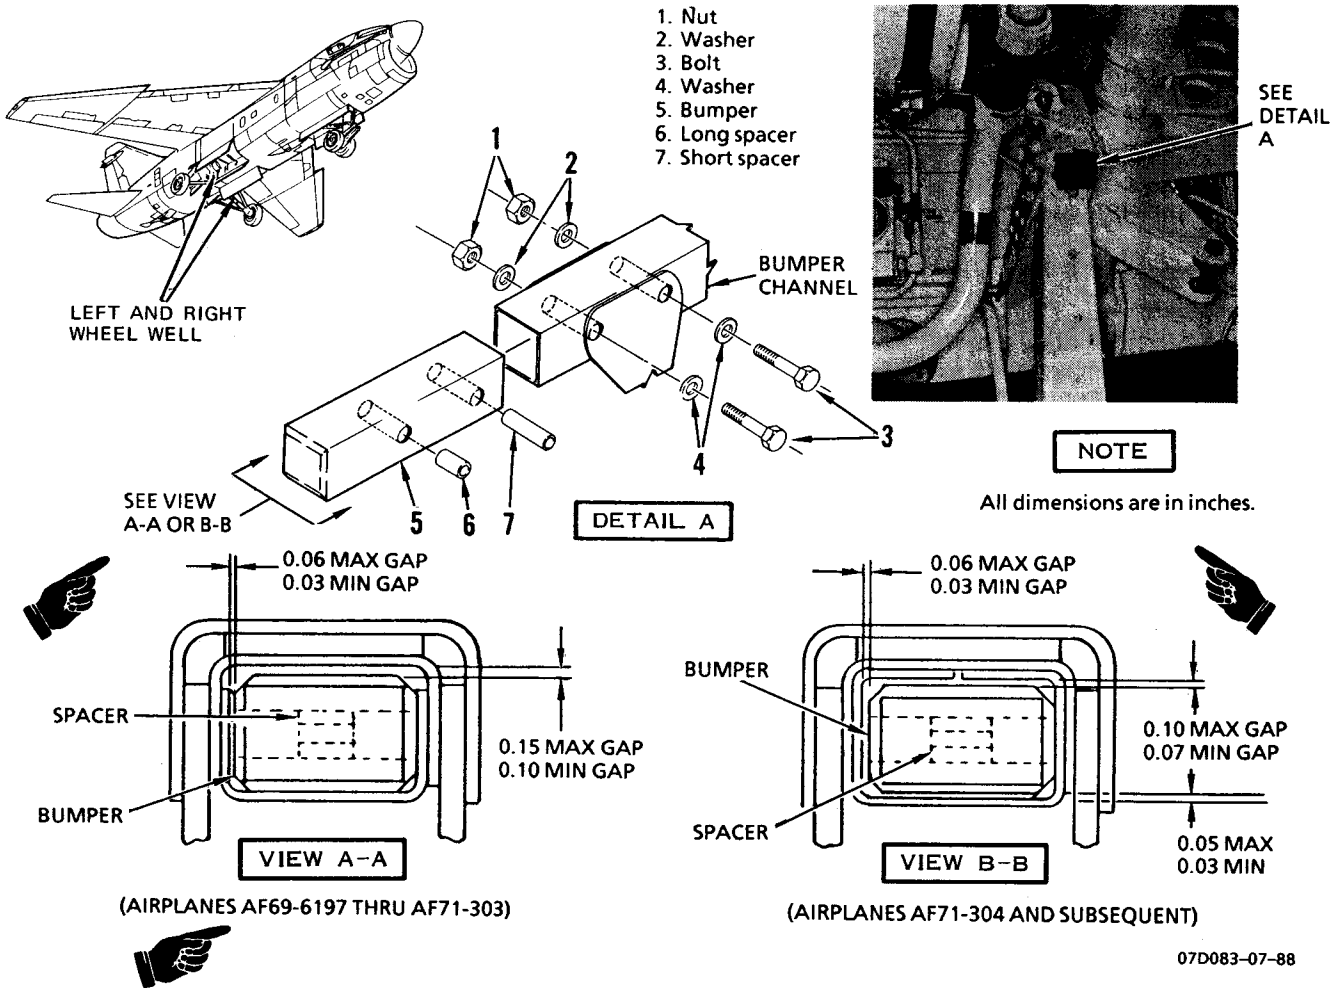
Main Landing Gear Up Bumper Removal and Installation
